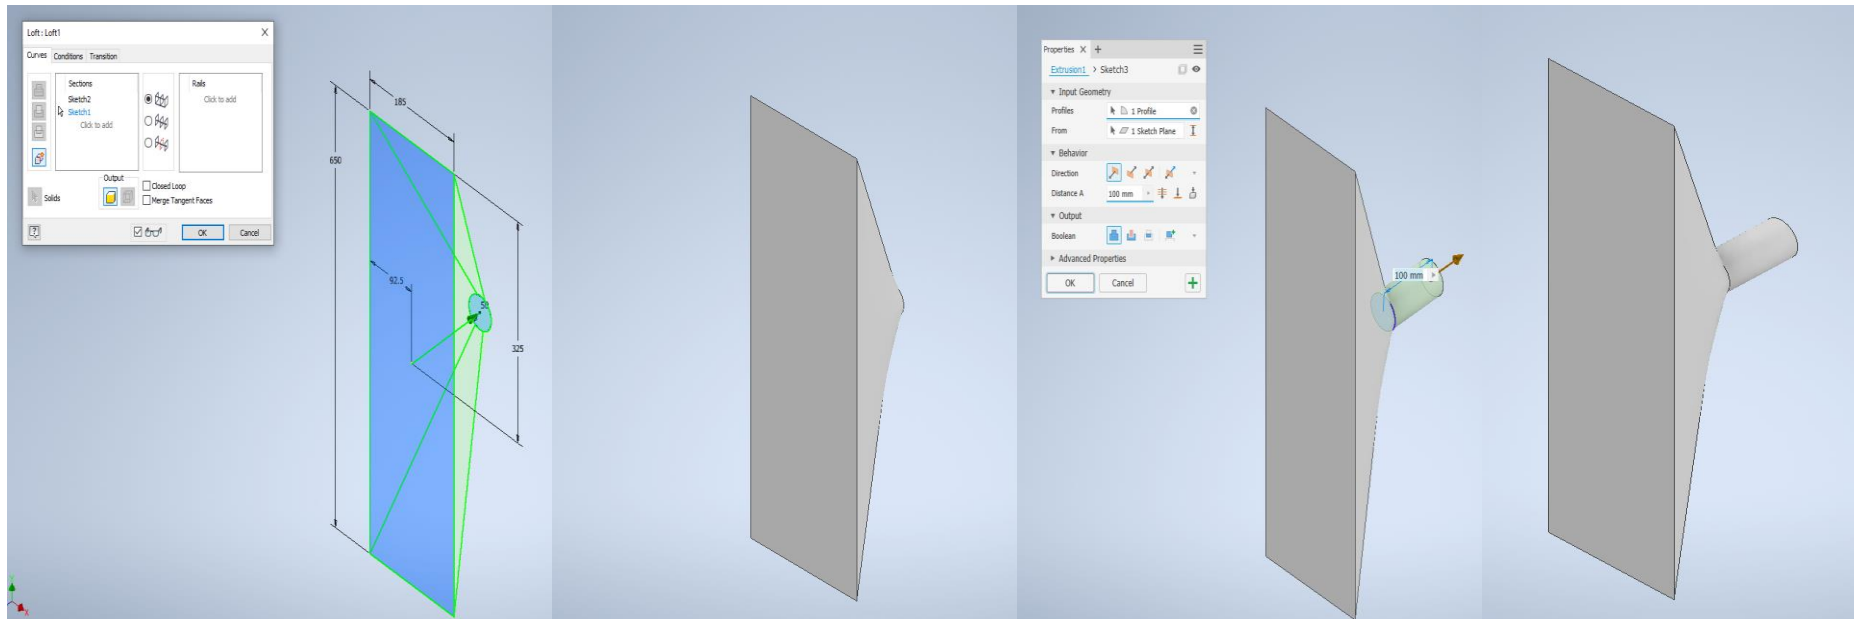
Drawing the Outlet diffuser part first with the “Loft” and then the “Extrude” tools.
